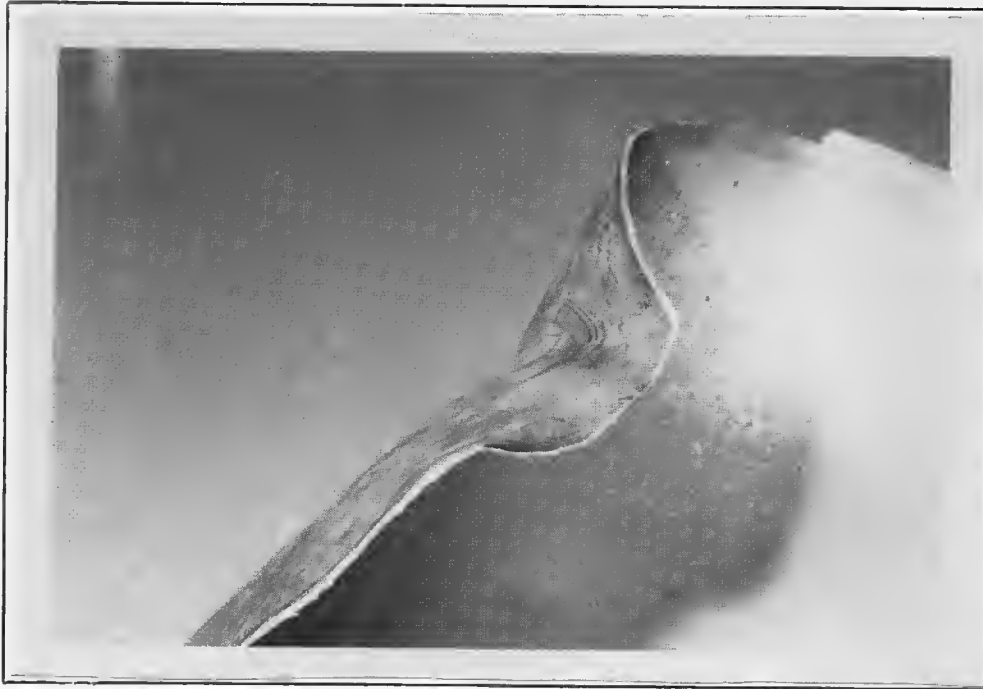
Body Plate at Modified Head; note the deformed shape as fracture changes direction.
